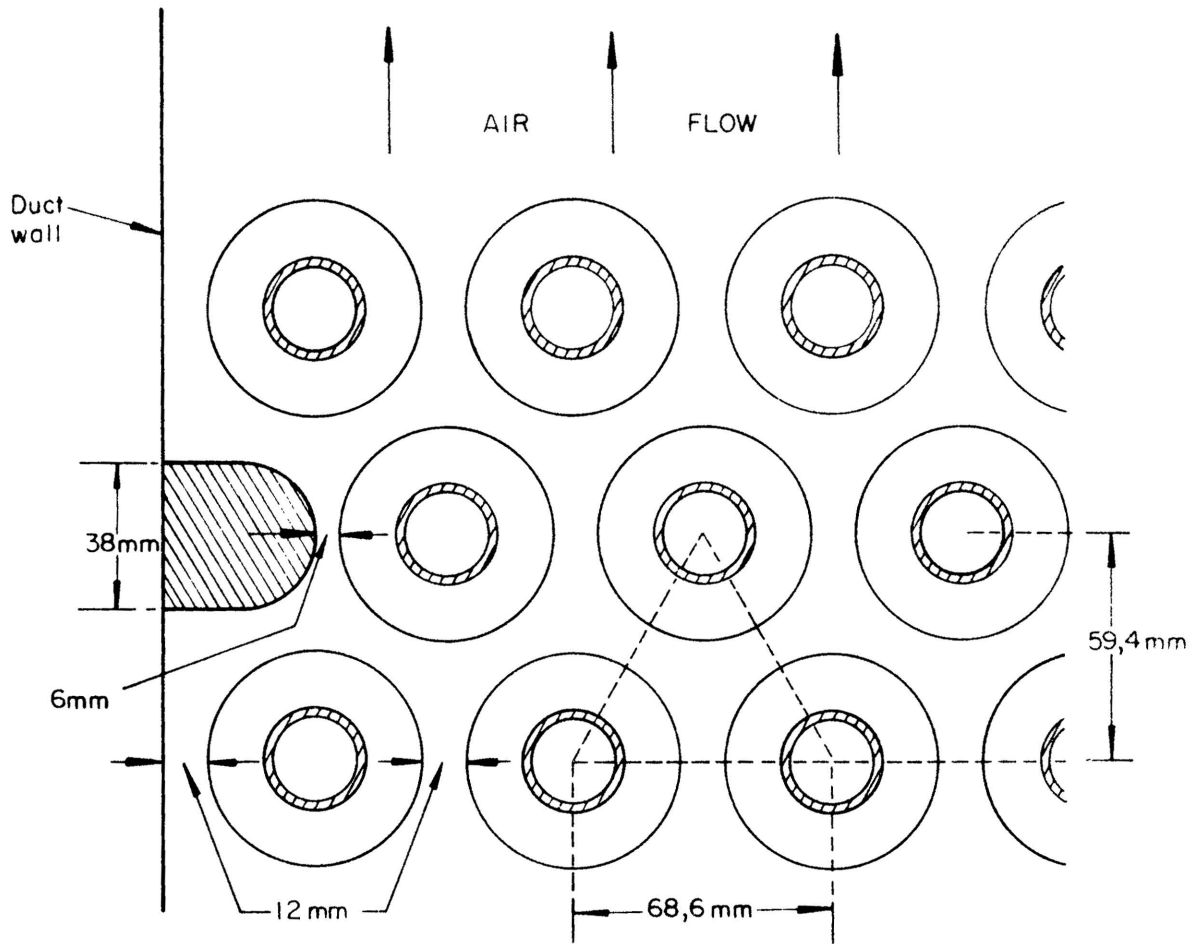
SECTION OF FIN TUBE BUNDLE SHOWING WOODEN SECTION ON DUCT WALL
